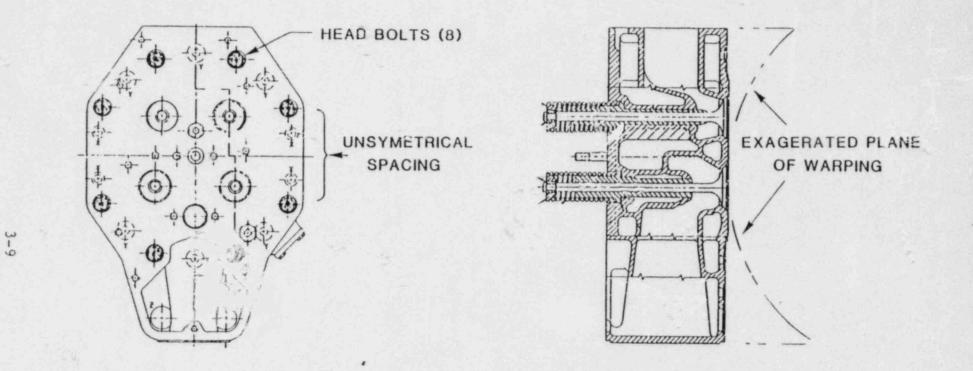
DMRV-16-4 Cylinder Head and Valves
